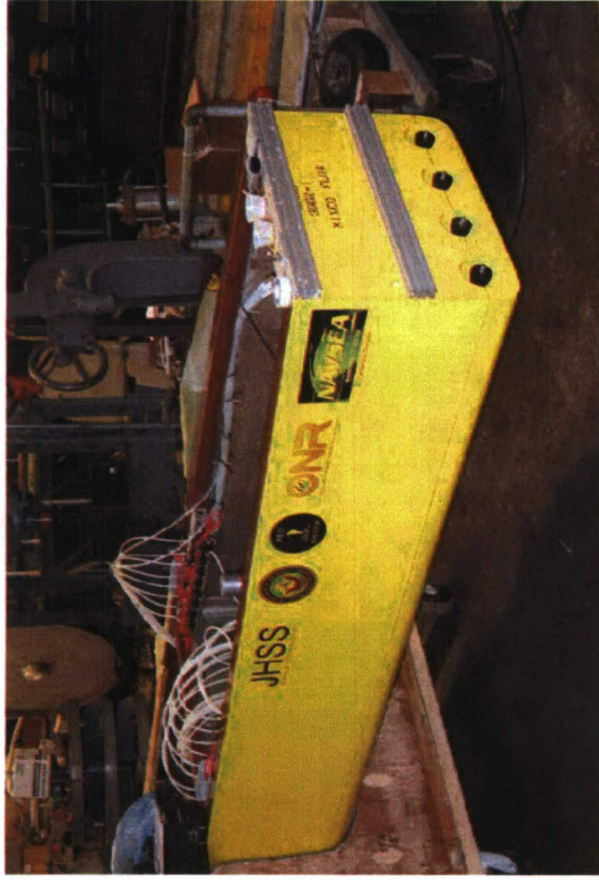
MxWJ Model 5662-1 construction and equipment installation (Feb-June 2007) - continued
